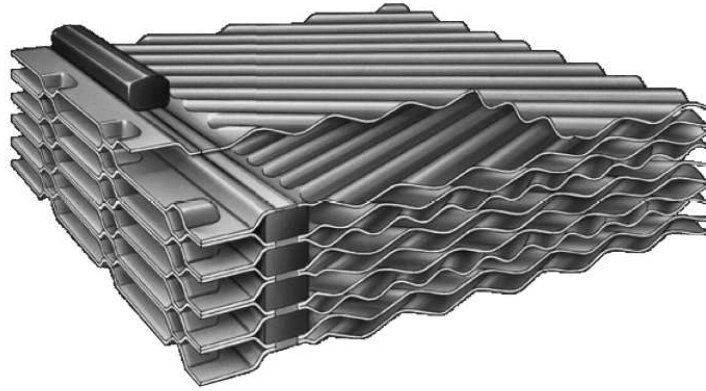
Section of a welded plate heat exchanger [28].
